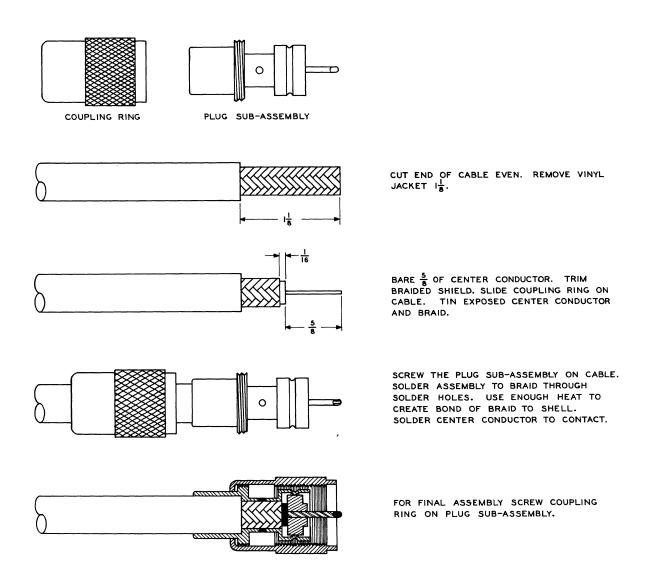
Assembly of PL-259 Connectors to Coaxial Cable
